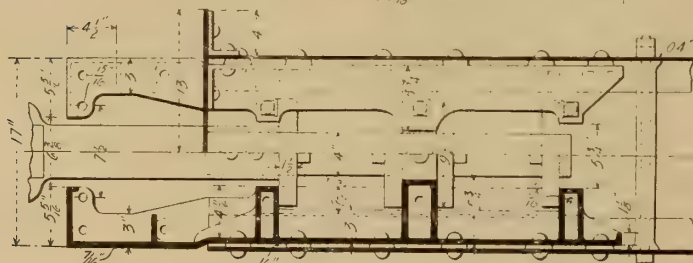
TWIN SPRING DRAFT GEAR. GONDOLA CAR, LAKE TERMINAL R. R.
